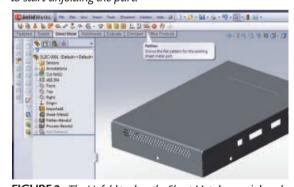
The Unfold tool on the Sheet Metal menu is handy for toggling the part between the flat and folded versions.
